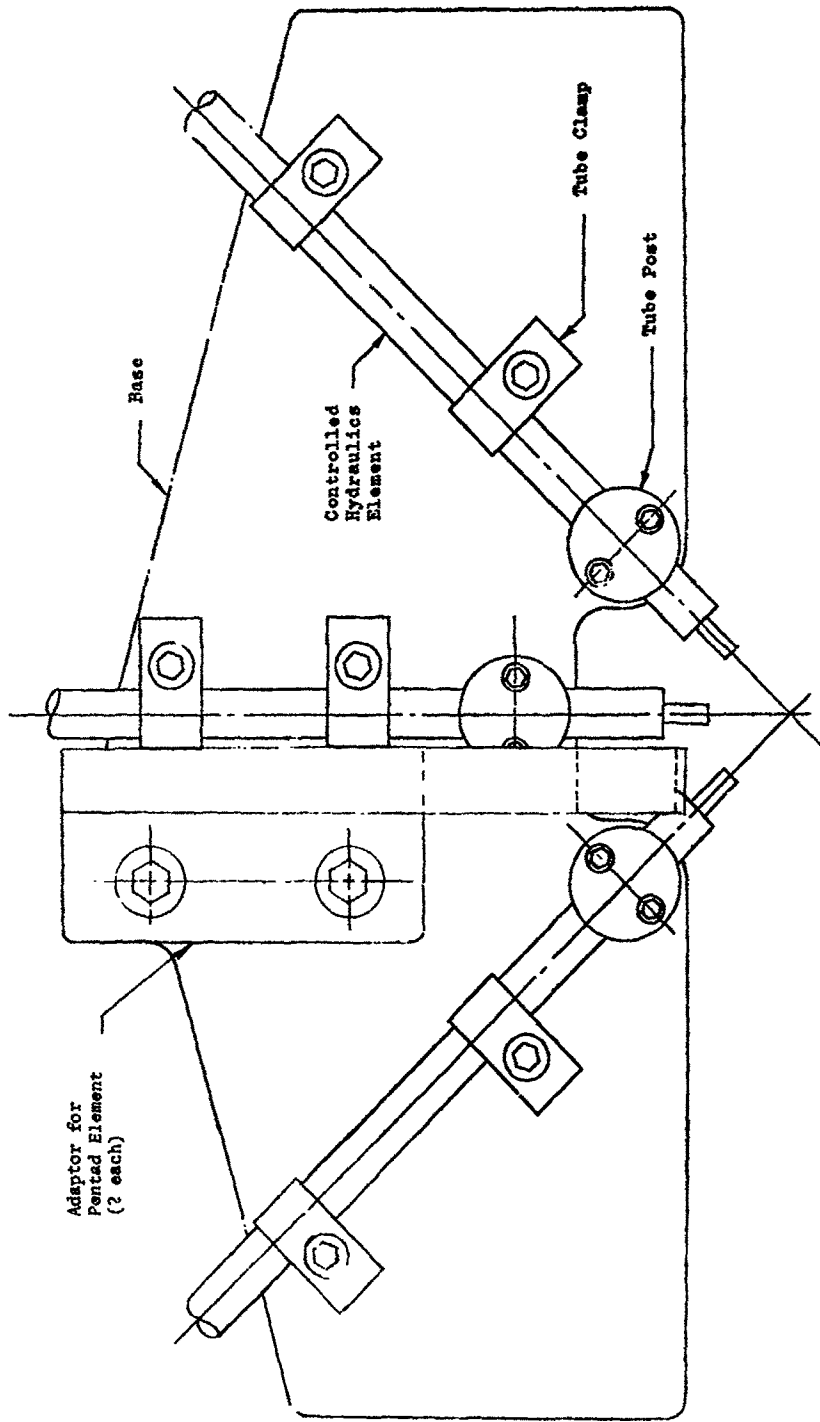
Adjustable Injector Design Incorporating Controlled Hydraulics (L/D = 50) Elements (Triplet Configuration Shown)
